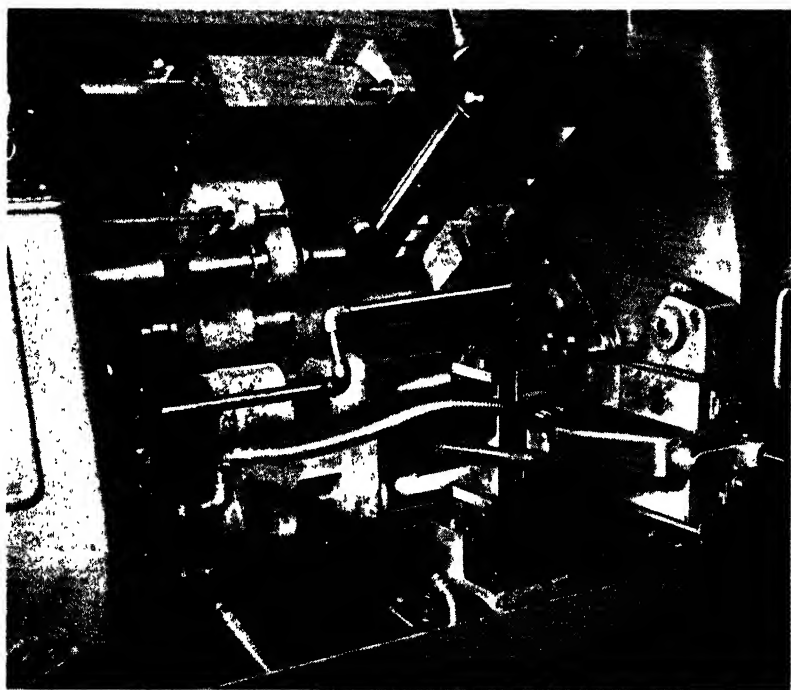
Automatic Employed for Finish-turning, Finish-facing and Cutting the Ring Grooves on the Pistons
